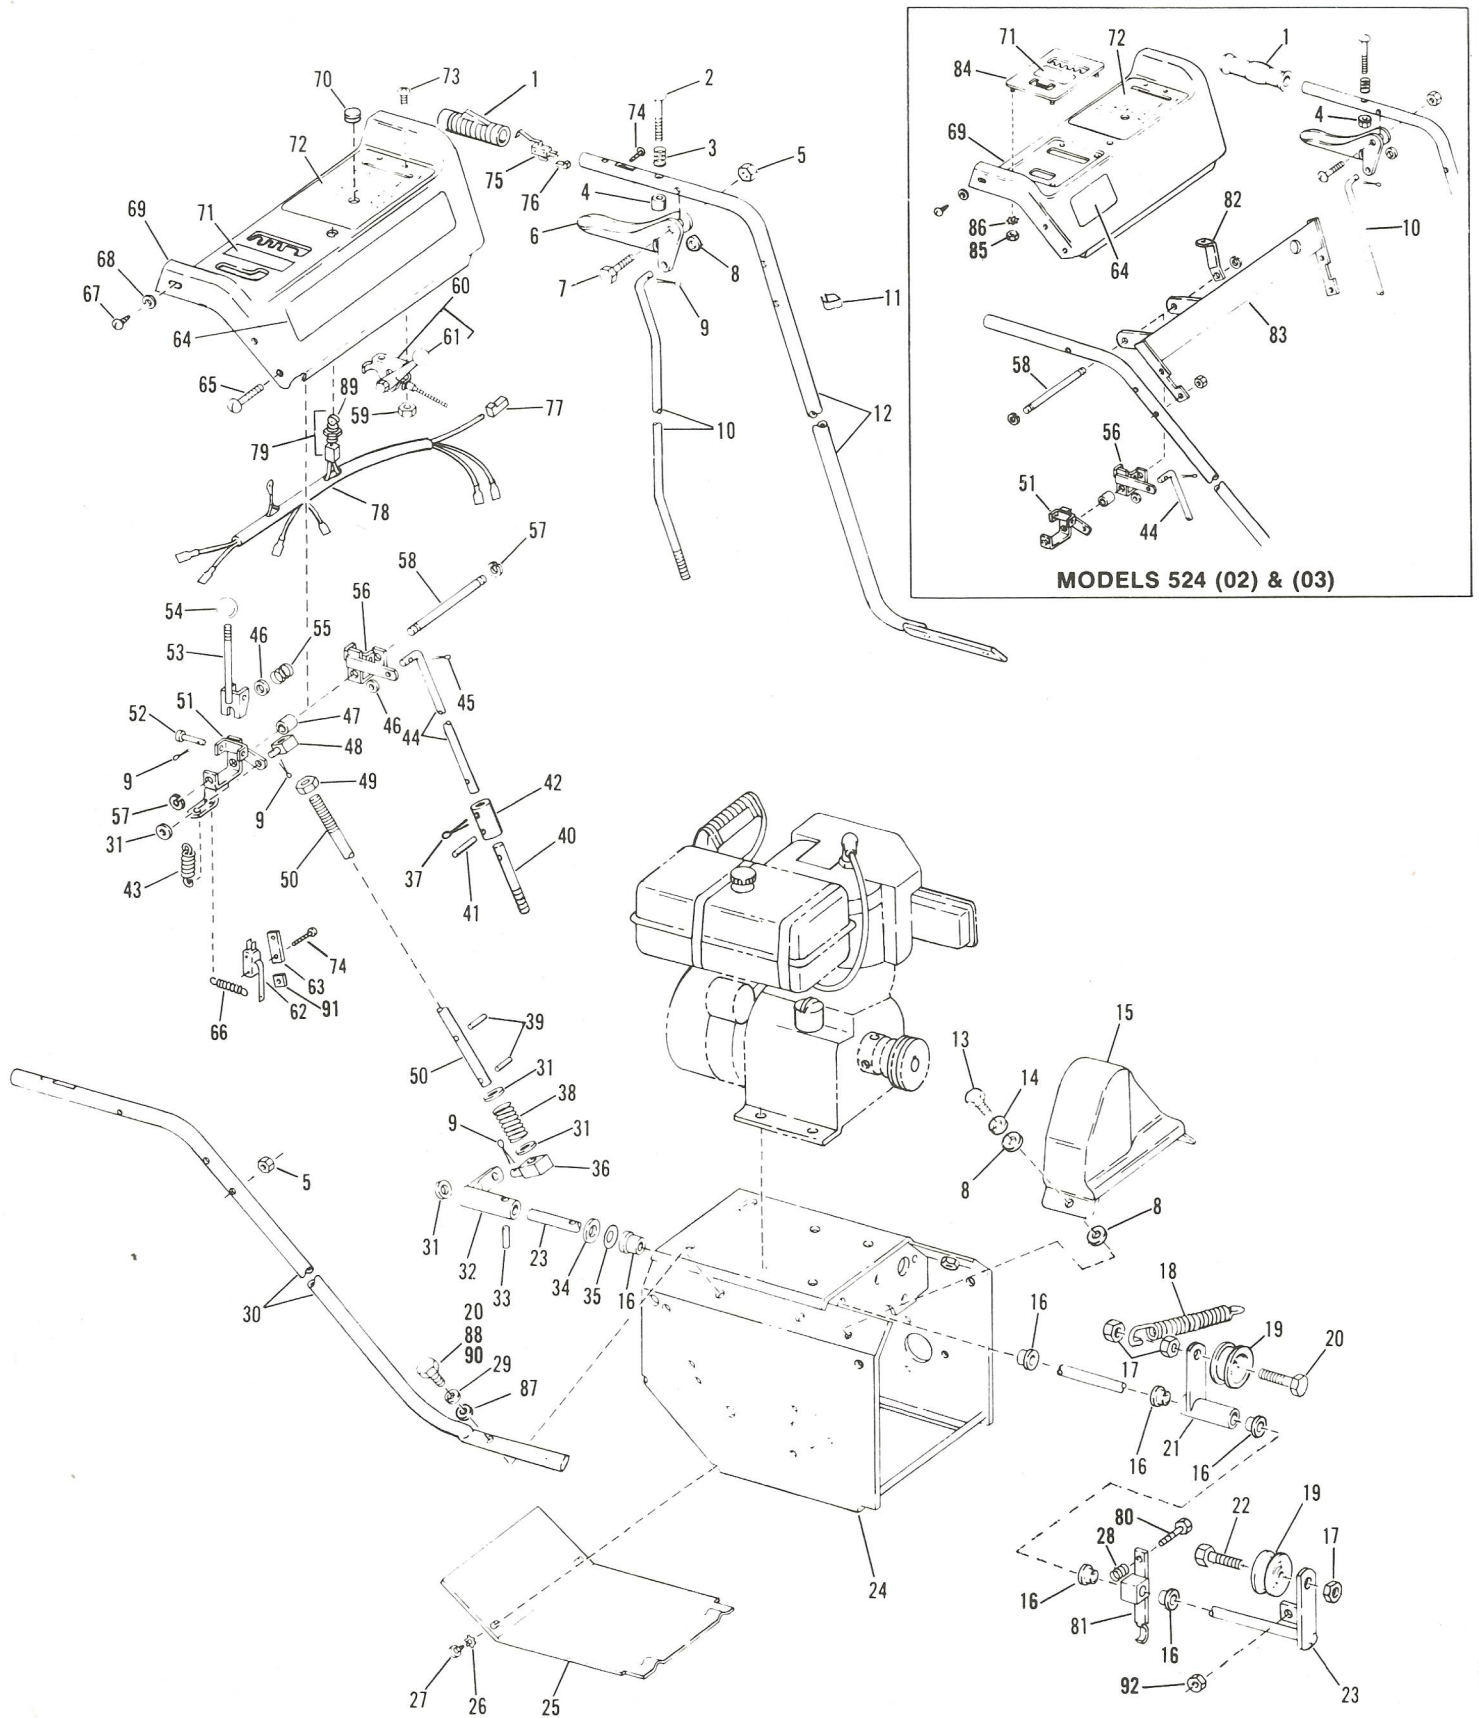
TRIM, CONTROL AND FRAME ASSEMBLY
